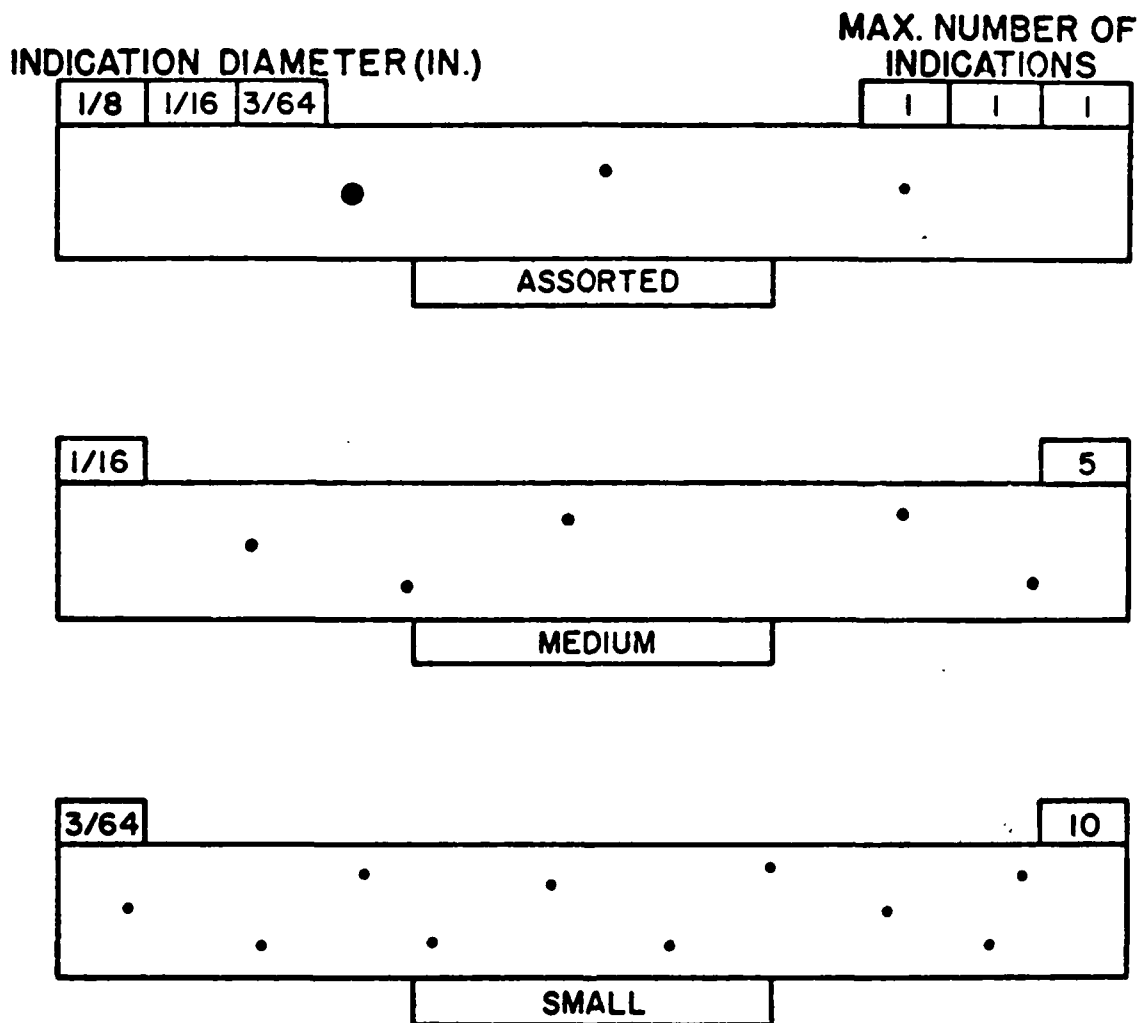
Class 1 Weld Surface Inspection Standard for Scattered Rounded or Non-Linear Indications (Sheet 5 of 6).
